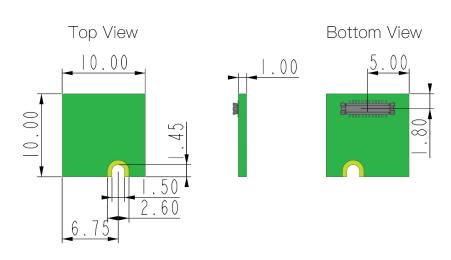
RAK1901 WisBlock Sensor Mechanic Drawing
